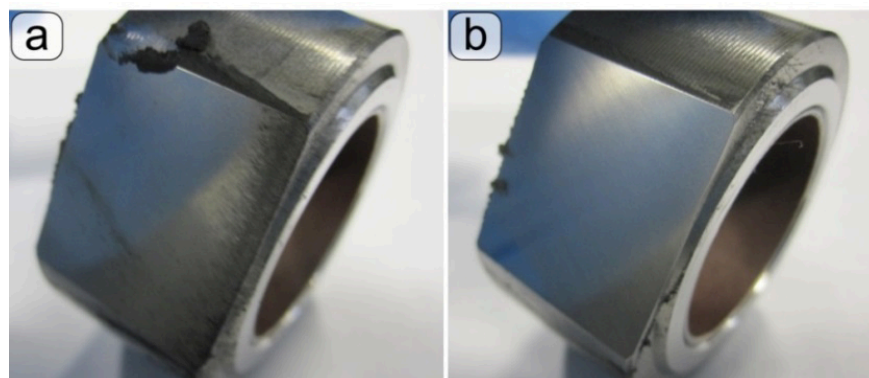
Polishing paste on the two flat faces of the workpiece: a surface will be more dirty (Side A – Picture a) than the other surface (Side B – Picture b) due to the polishing system (Courtesy of Brovedani SpA)
